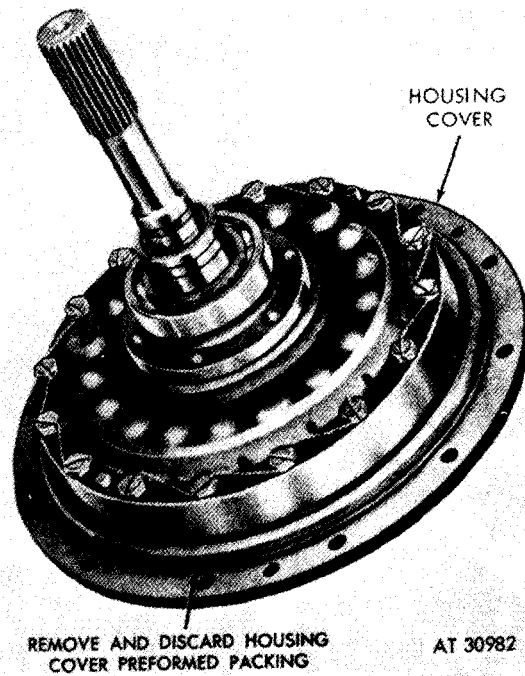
Removing or installing fan drive housing cover preformed packing.
